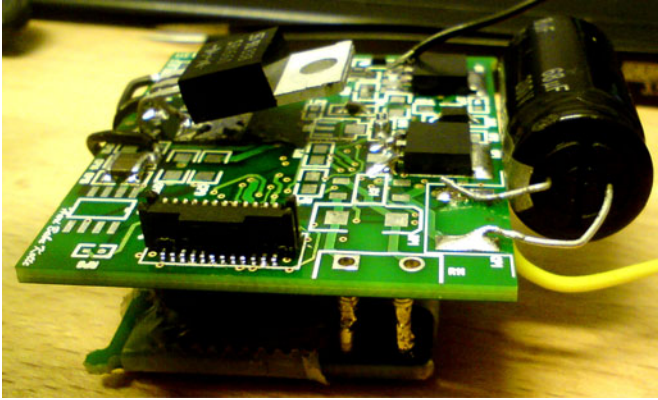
Prototype of the SRC (45 mm × 35 mm) including coreless PCB transformers.
